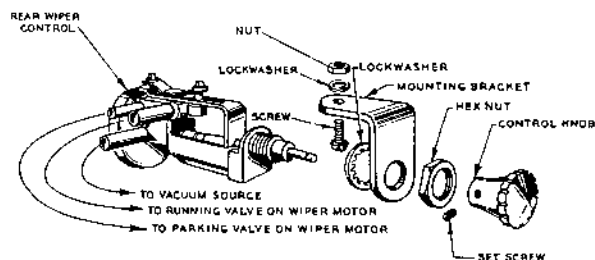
View Showing Relative Position of Wiper Motor Attaching Parts
